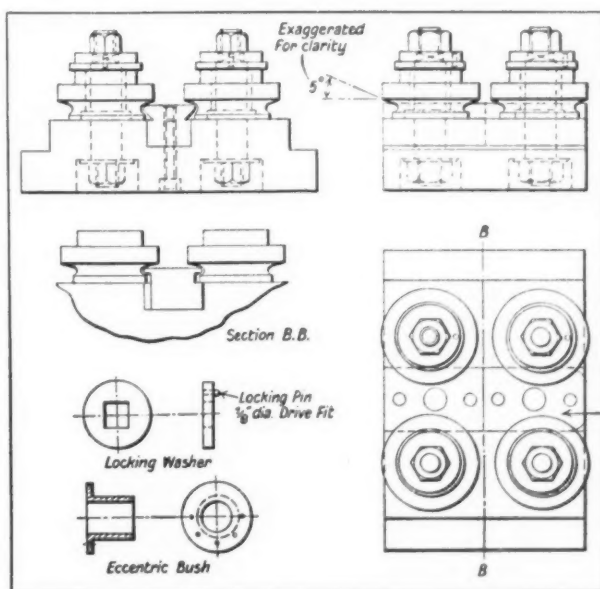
Auxiliary Box in which the Third Stage of the Roll-forming Operation on the Stringer Section Shown in Fig. 1 is Performed
